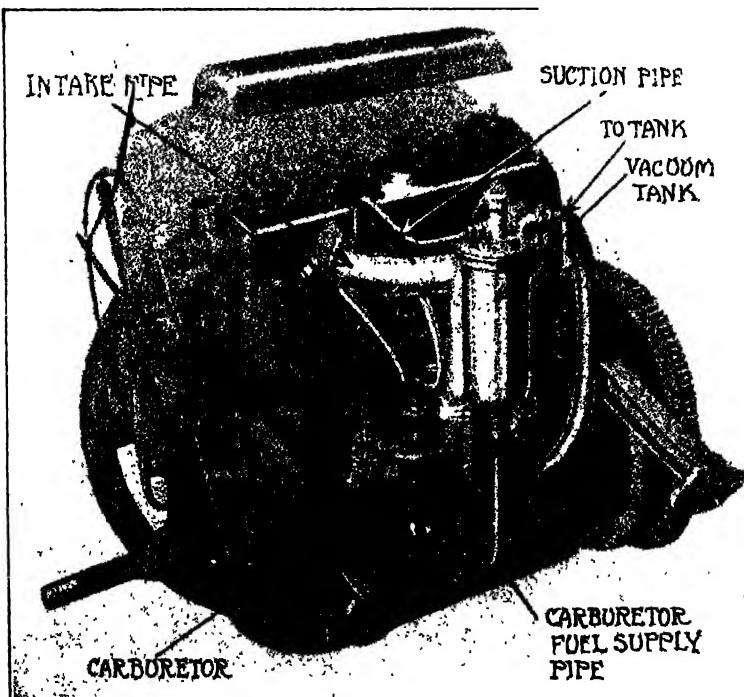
Stewart Vacuum Tank Applied to Inlet Chevrolet Motor.
